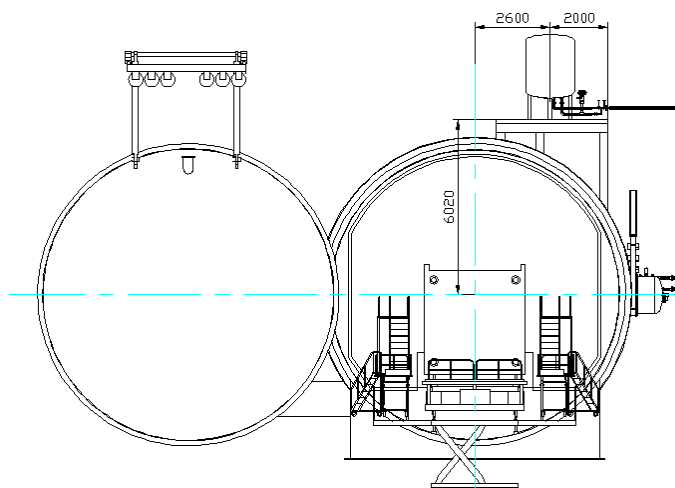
(b) Layout drawing of gravity circulation loop system in left view
